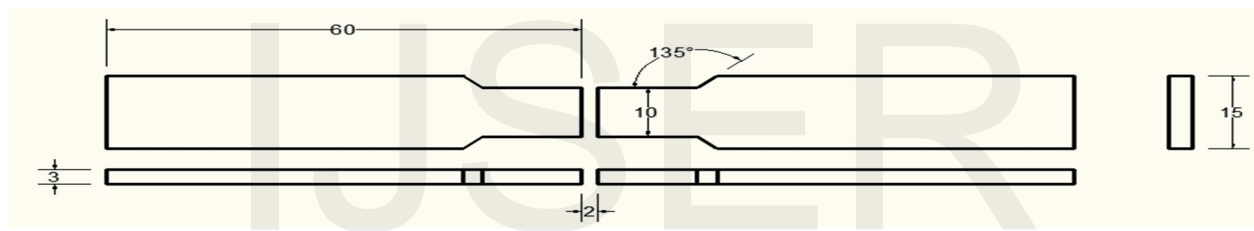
Standard Joint Preparations for plain face sample for welding
